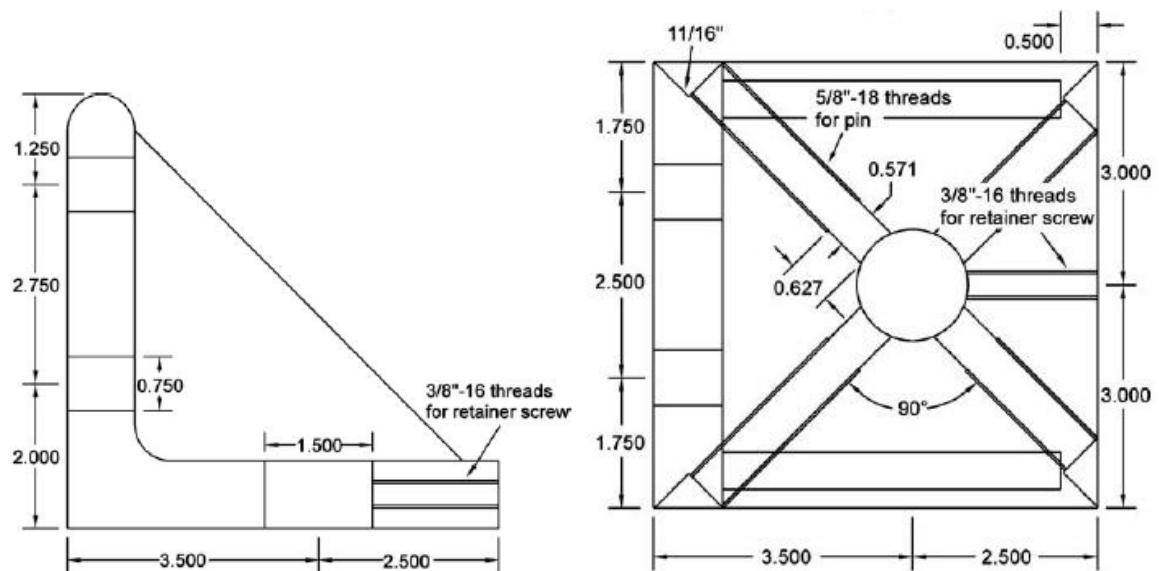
SAMU Fixture Detail for Elevation View (left) and Plan View (right) [from Hoehler et al. 2011]
